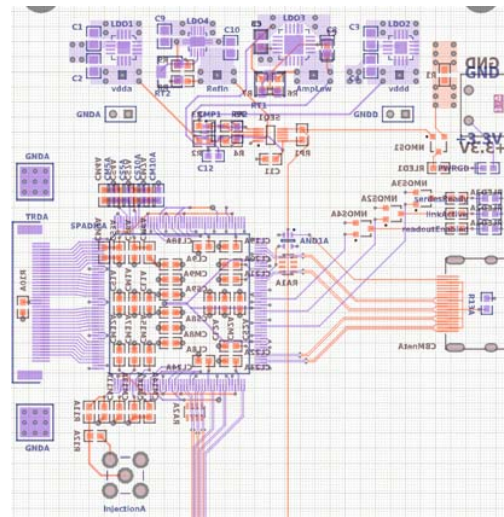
Layout of the top third of the new PCB, containing the voltage regulators and one of three SPADIC chips.
